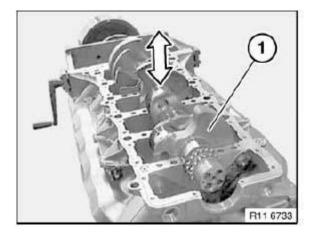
Laying Crankshaft Into Crankcase Courtesy of BMW OF NORTH AMERICA, INC.
